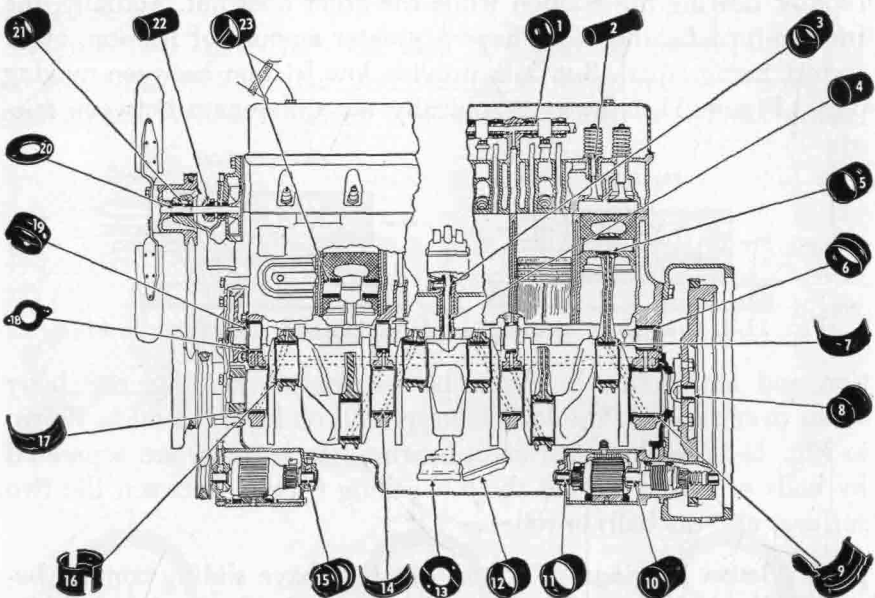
Various bearings and bushings used in a typical engine. (Johnson Bronze Company)
